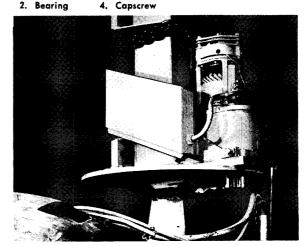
REMOVING MOTOR, GEAR BOX AND HOUSING
